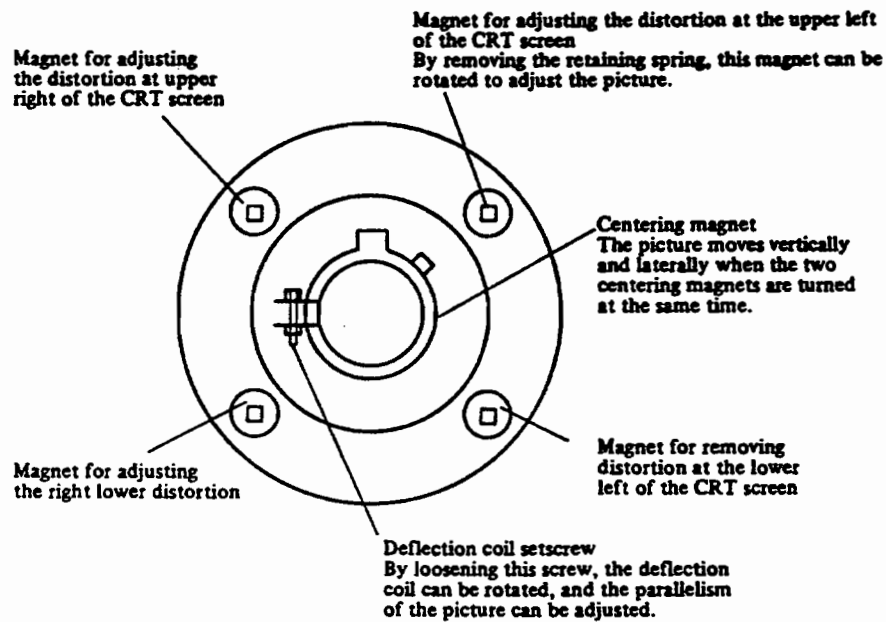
(a) Adjustment position (Rear view of CRT)
